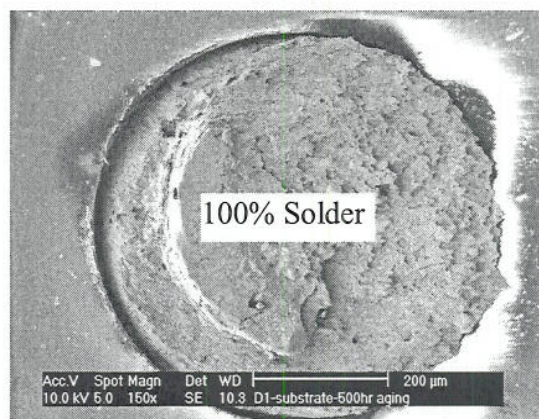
Typical fracture surfaces of the solder joint (substrate pad side) for a thin Au layer (0.1  $\mu\text{m}$ ) aged for 500h at 150°C.
